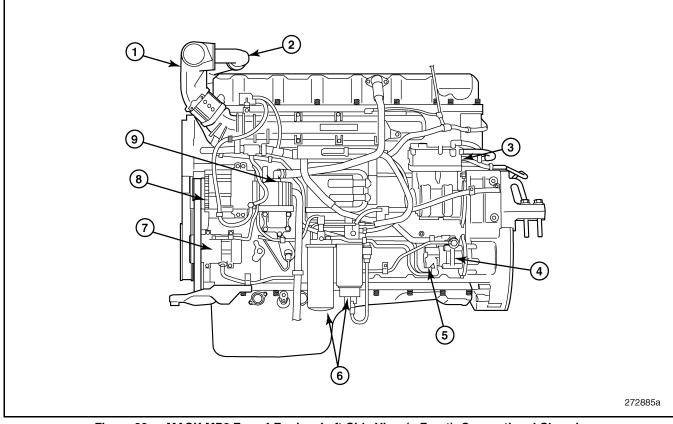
MACK MP8 Euro 4 Engine, Left-Side View (< Front), Conventional Chassis
